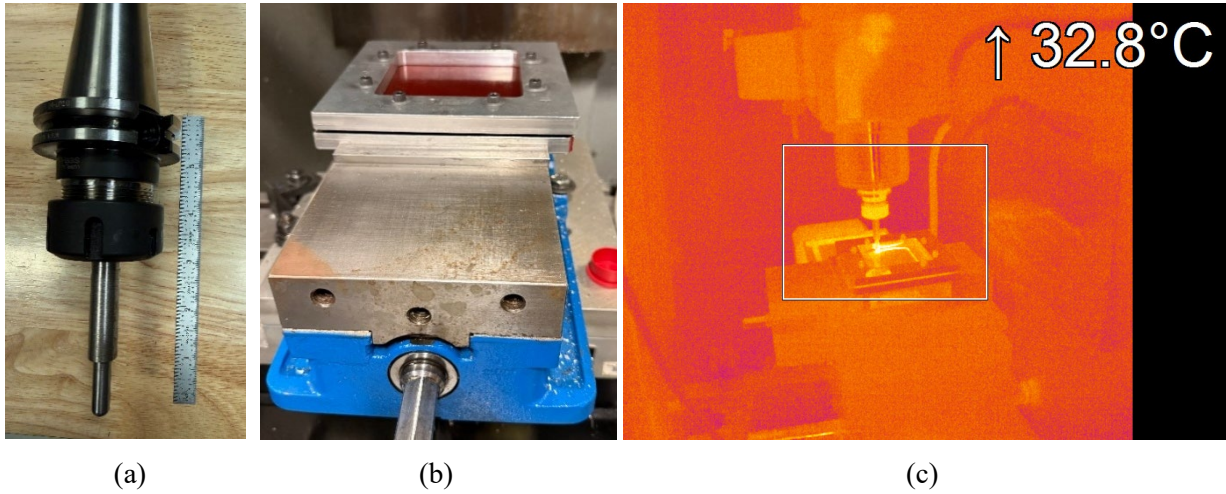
(a) Tool geometry, (b) Kurt Vise with fixture setup, and (c) forming set up as seen by the thermal camera.
